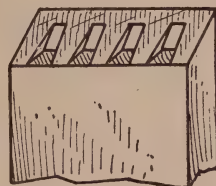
Sockets for Mitred-through Dovetail Joint
